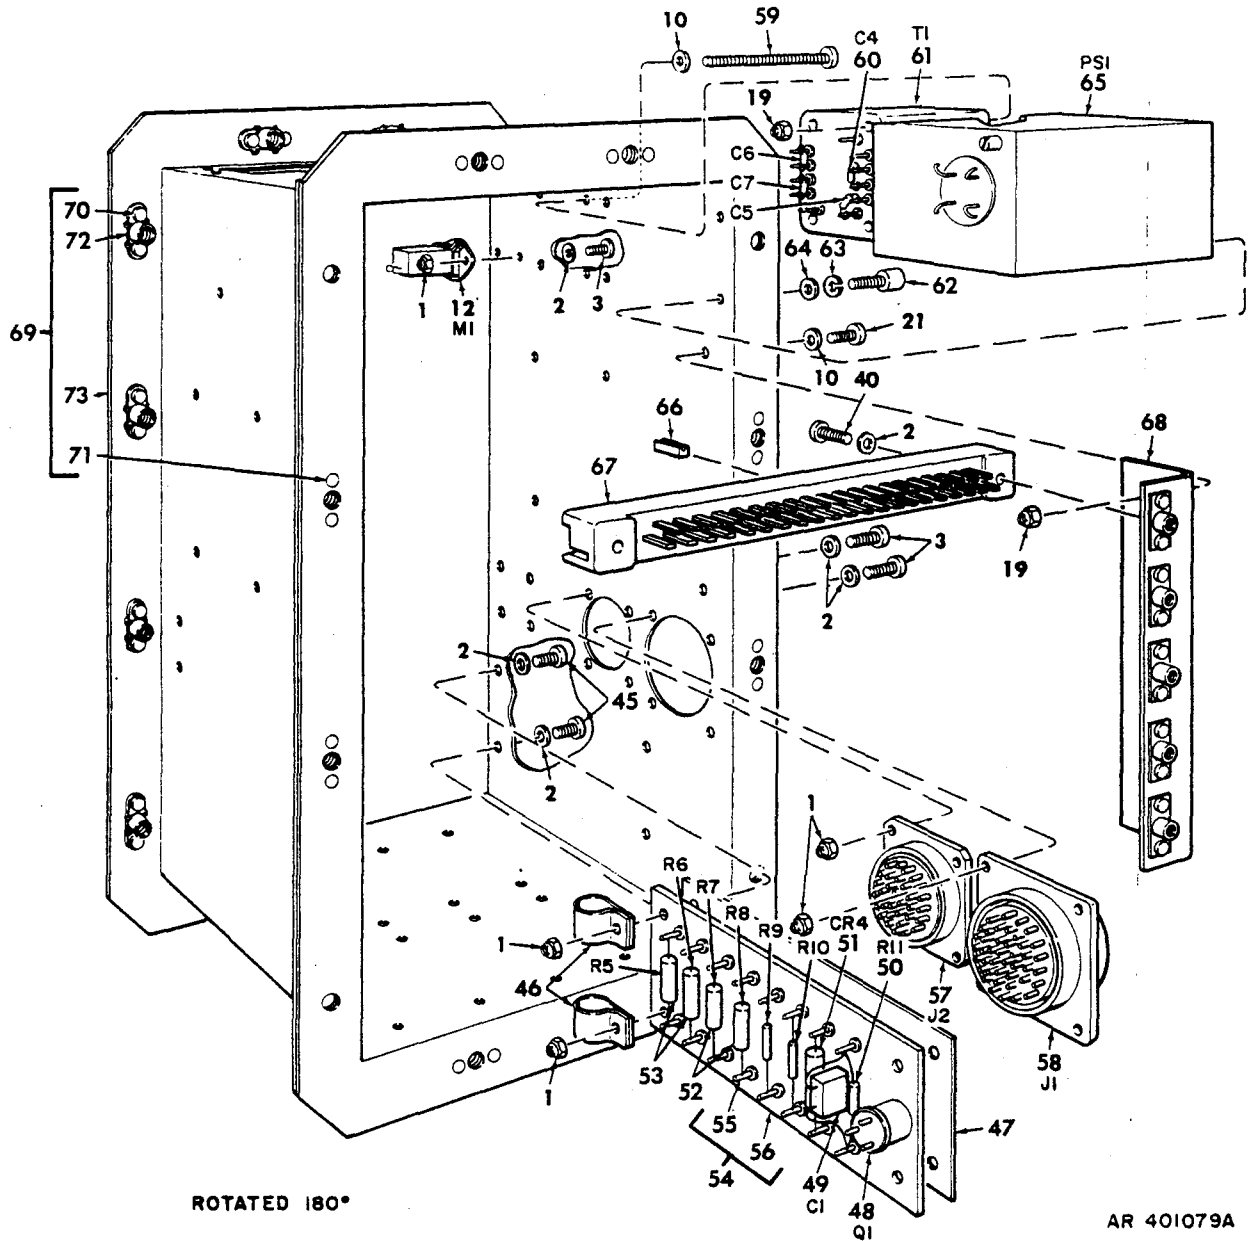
Electronic interface subassembly from HSS XM128 - exploded view (sheet 2 of 2)
